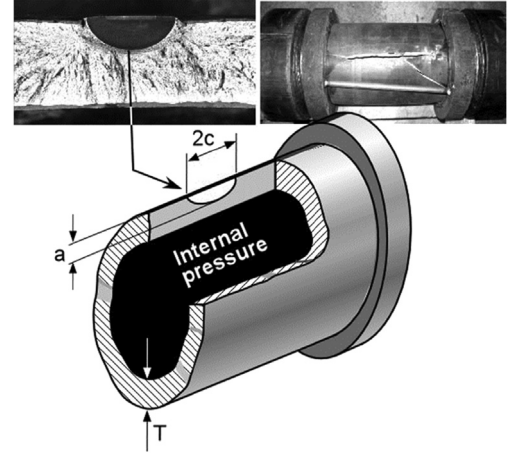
Top: Fracture surface of Pipe #2 after the burst test. Bottom: Schematic drawing of the capped-end pipes.
